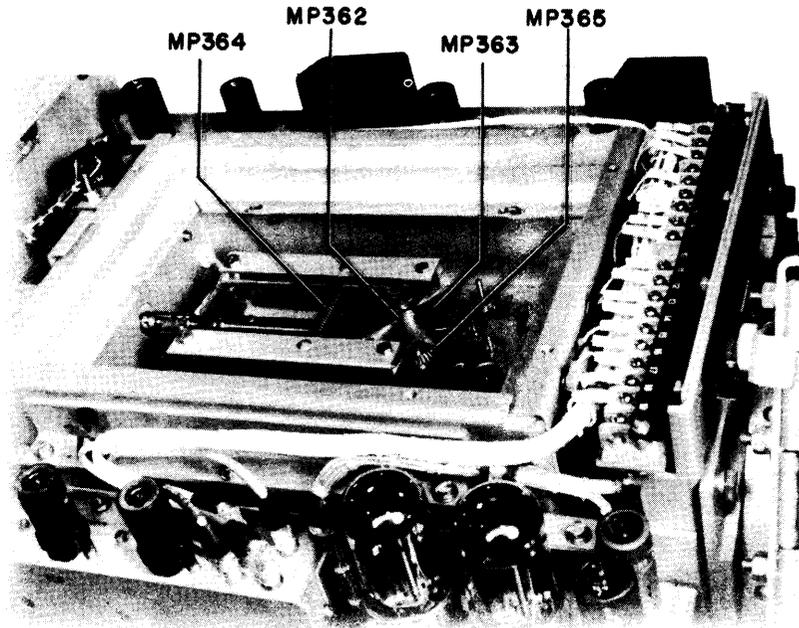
A. Radio Frequency Oscillator O-581/WRT-2, Master Oscillator Oven Gear Train, Location of Parts, Sets Serials 107 and up
